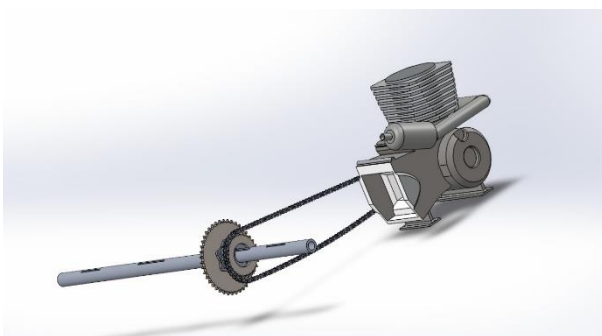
TRANSMISSION SYSTEM ASSEMBLY
